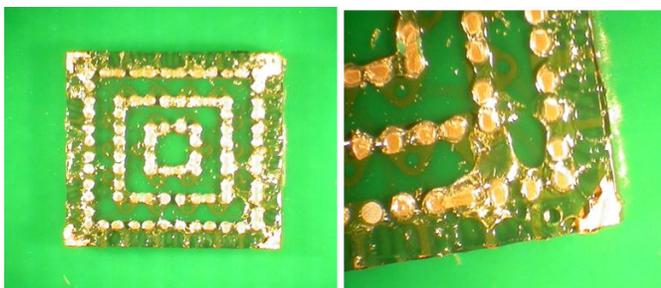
Bottom view of a BGA assembled with epoxy flux A after being pried off.
